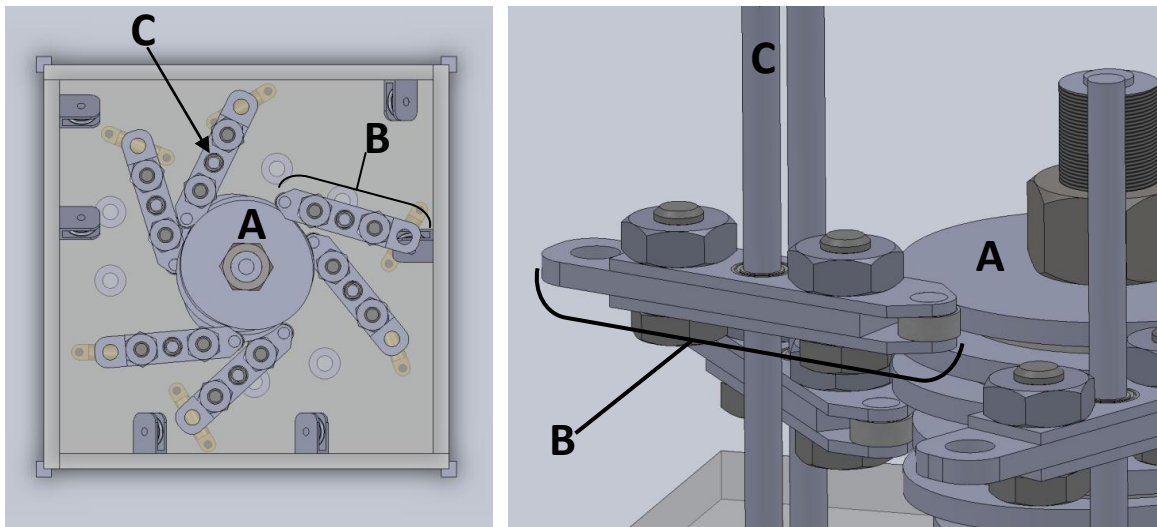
Cam-Follower Arrangement Top-View (Left), Close-Up of Cam-Follower (Right)
